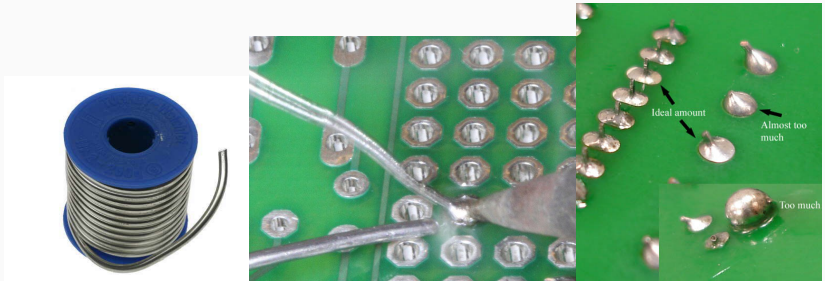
(Left) Solder, used to bind components to board. (Middle) Example of soldering iron causing solder to flow onto the heated hole. (Right) Examples of correct and incorrect soldering.
